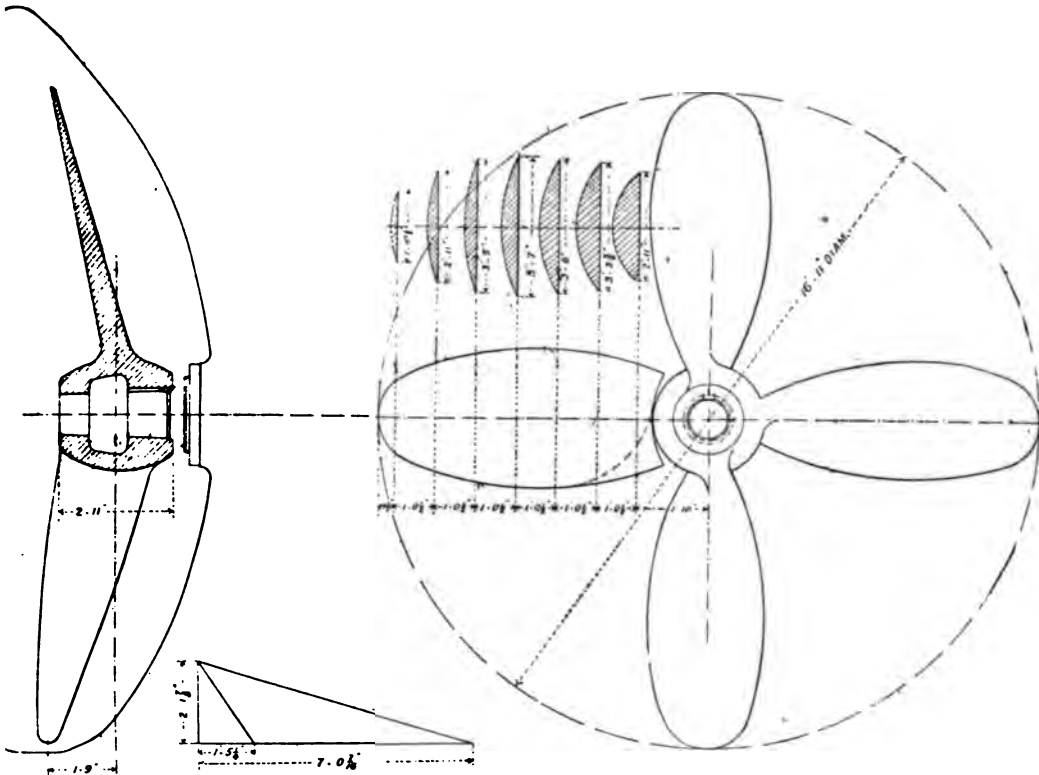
Solid Propeller. (Pallion Engine Works.)
